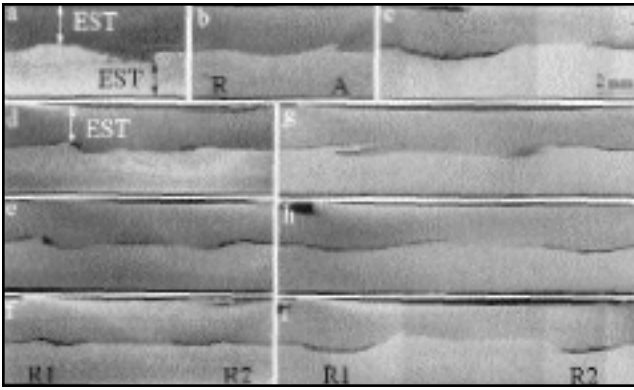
Metallographic cross sections of FSW lap joints (transverse to welding direction). The top sheet is Alclad 2024, and the bottom sheet is 7075 in all cases. For single-pass welds (A–C), the advancing side is on the right. For double-pass welds, R1 is on the left. A — Single-pass weld No. 1, showing the locations of the minima in the EST (effective sheet thickness) on the advancing and retreating sides. The difference in interface shape (advancing vs. retreating) may also be observed. B — Single-pass weld No. 3, identical to weld No. 1 except for reduced pin length. C — Single-pass weld No. 7, identical to No. 3 except for increased (2X) shoulder and pin diameters. Note the relatively flat interface. D — Double-pass weld No. 9 showing the location of the minimum EST on the R1 side. E — Double-pass weld No. 10 identical to No. 9 except for wider separation distance resulting in unbonded interface in the center of the weld. Note the similarities between the interface shapes in D and E. F — Double-pass weld No. 11. Higher welding speed relative to D and E results in a flatter interface (increased EST). G — The interface shape is comparatively flat. H — Double-pass weld No. 21 illustrating the effect of reduced pin length relative to G. The interface shape is comparatively flat. I — Double-pass weld No. 23 showing interface push down resulting from use of a pin length less than that used in weld No. 21.
